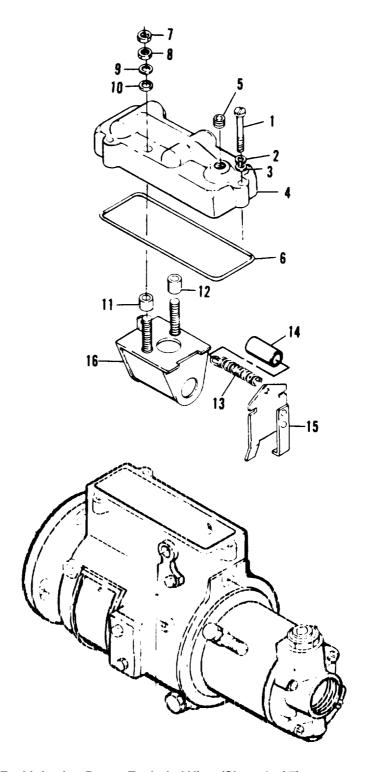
Fuel Injection Pump, Exploded View (Sheet 1 of 7)
